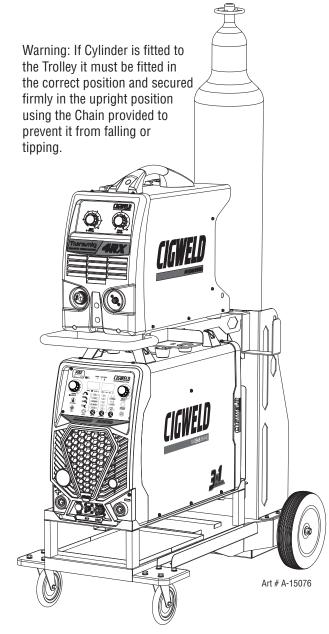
Welding Trolley and Welding Equipment
